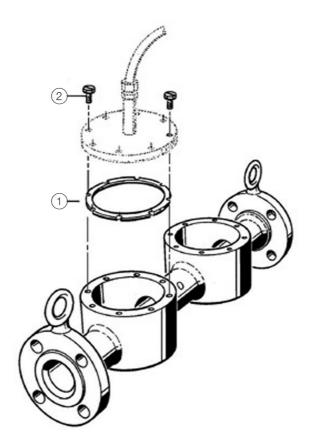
Model FPD470C with chemical-tee - replacement parts
